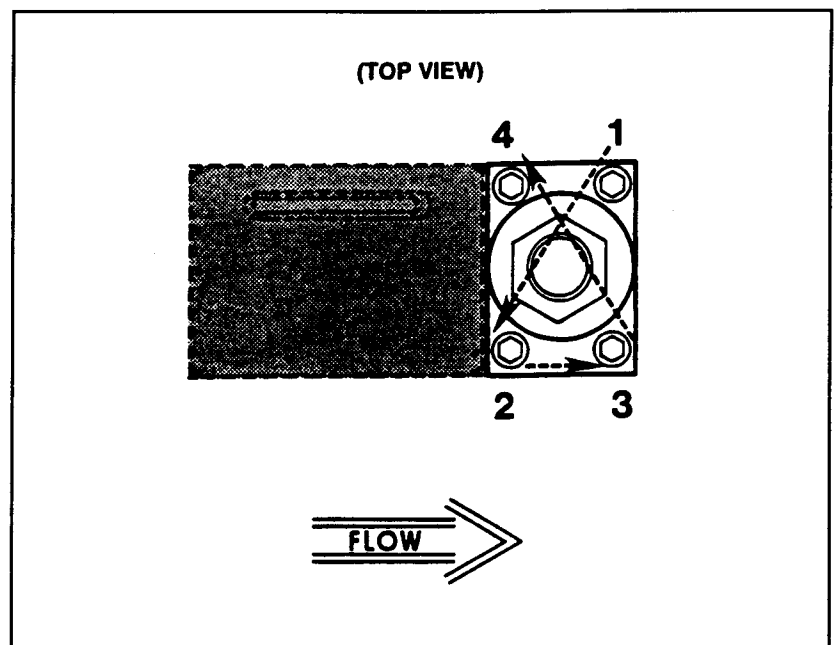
Torque Sequence for the Valve Retainer Plate
